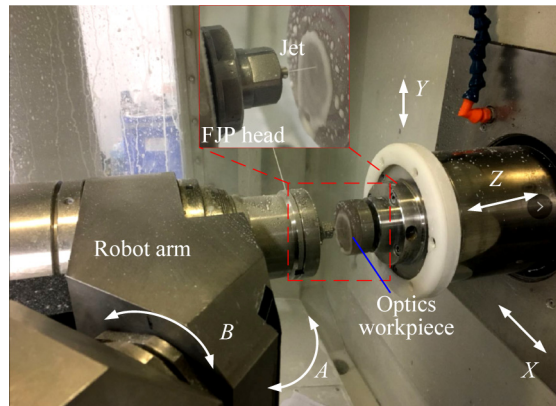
Experimental setup for fluid jet fabrication of freeform optics.
